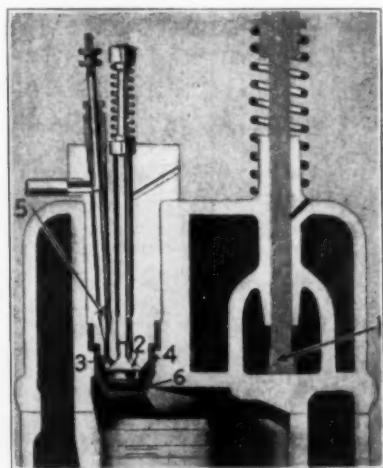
CROSS-SECTION OF THE INJECTOR VALVE OF THE HVID ENGINE
